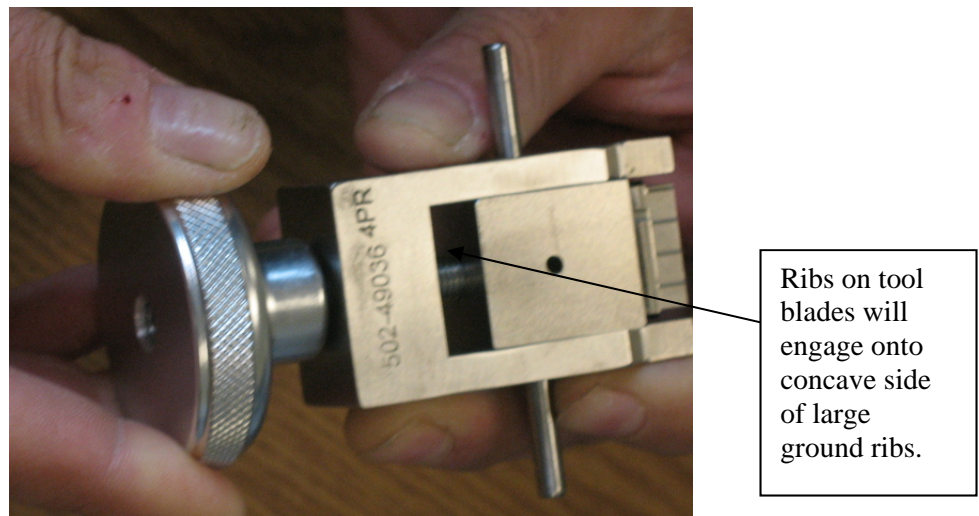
Loosening the Knob while Pushing Knob Toward C-frame
